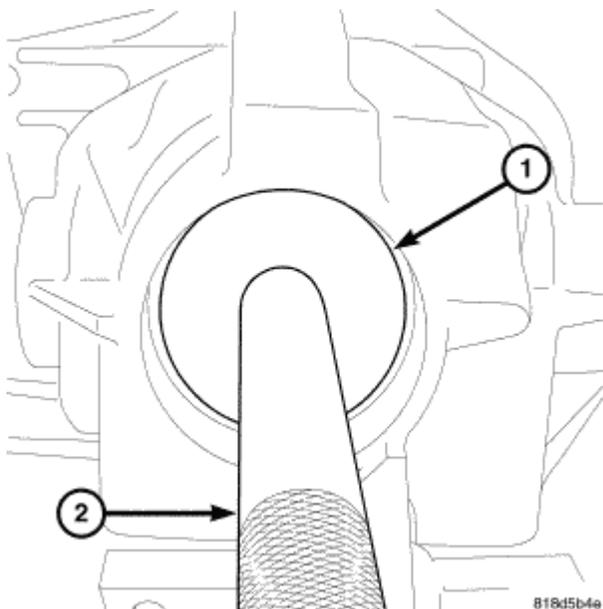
Installing Front Bearing Cup With Installer D-146 And Handle C-4171
